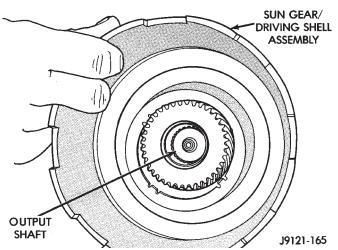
Installing Assembled Sun Gear And Driving Shell On Output Shaft
